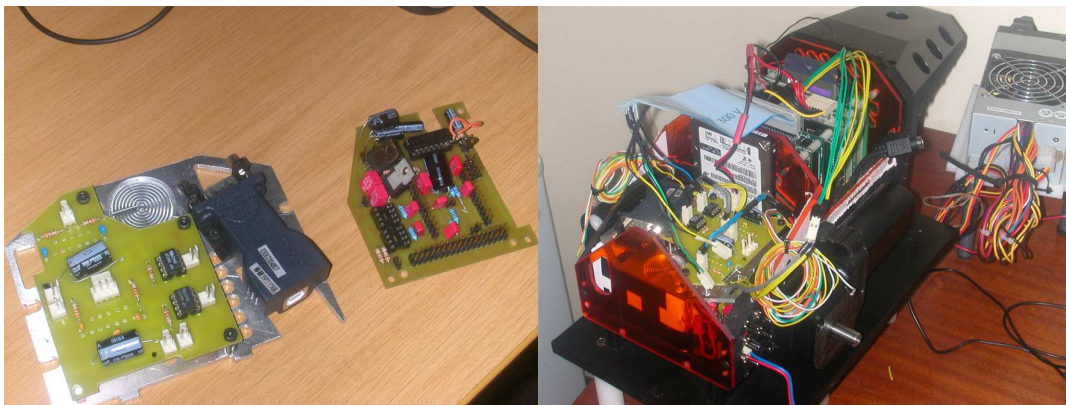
BOARD ASSEMBLED (LEFT) AND INSTALLED IN ROBOT (RIGHT)
